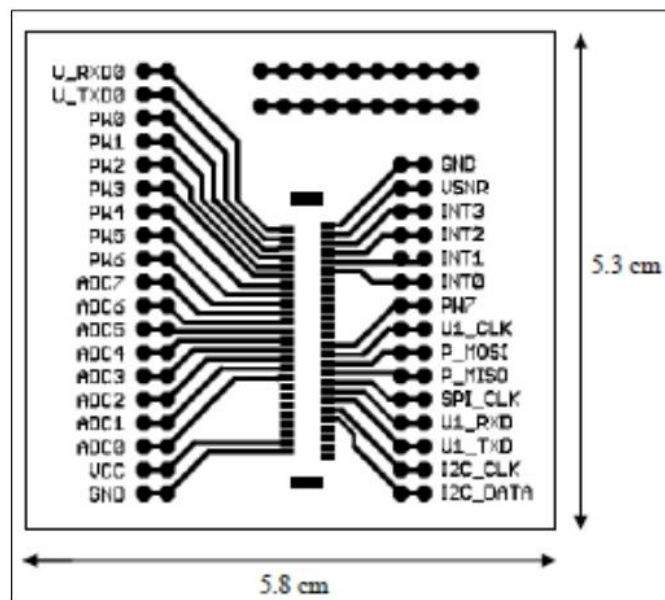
Layout of the 51-pin butterfly board
